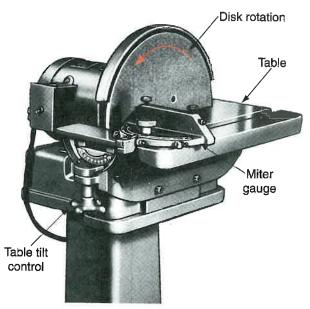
Locate table adjustment controls and rotation of the disk before using the disk sander. (*Powermatic Houdaille*)
